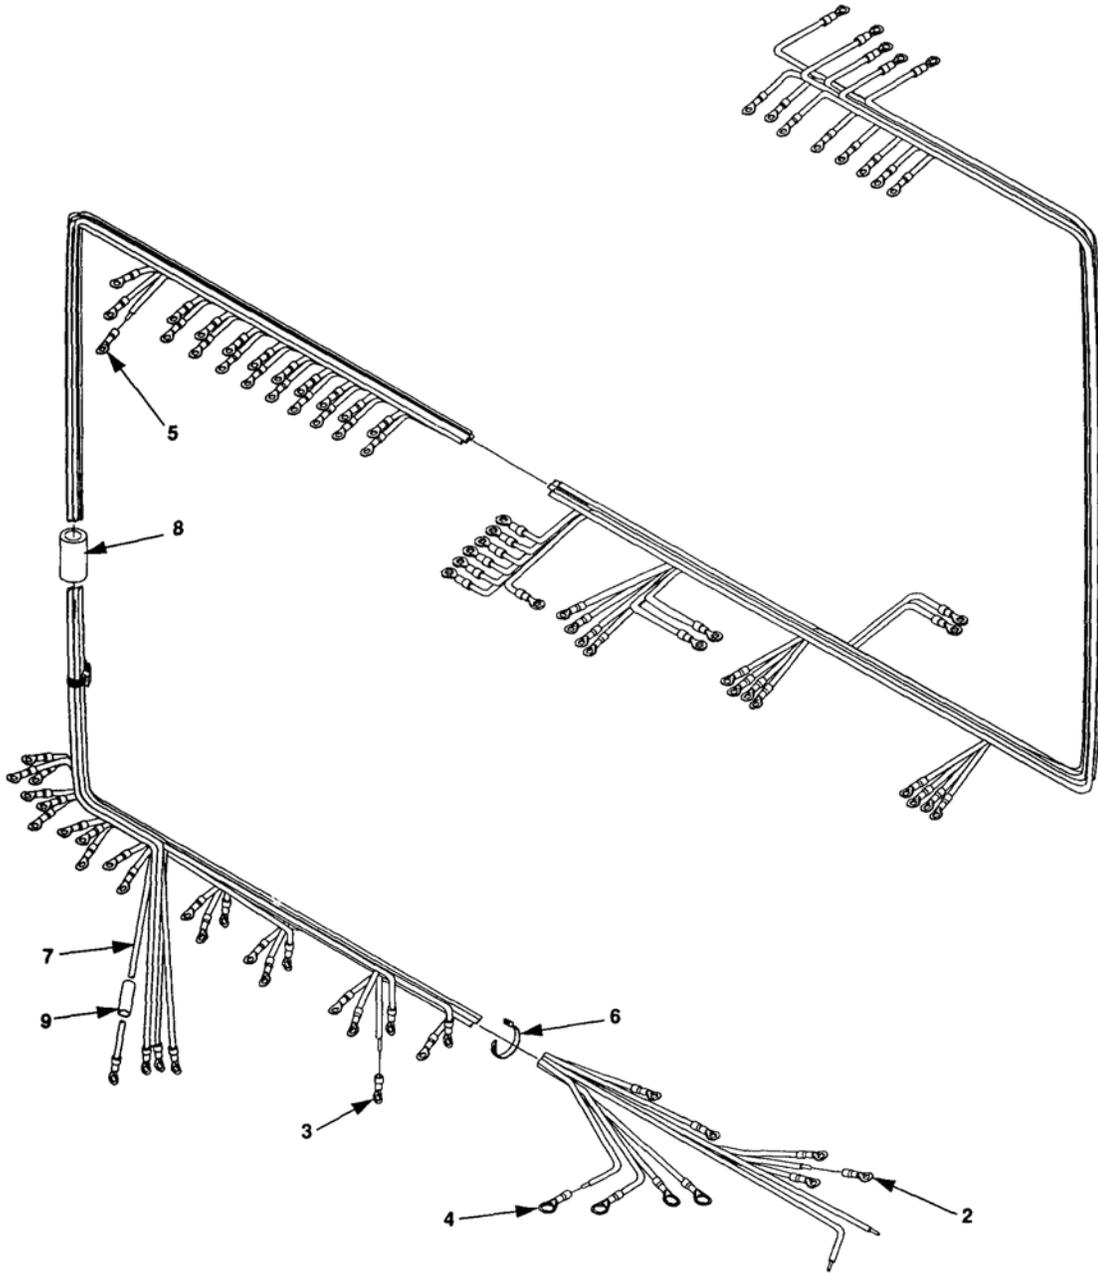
Switch Box Harness Assembly (Sheet 1 of 2).
